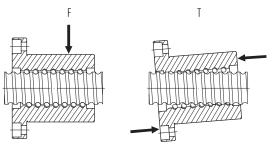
Uneven load distribution, caused by insufficient alignment of support bearing and ballscrew nut, incorrect configuration of mounting surface, incorrect angle or error in aligning the nut flange
